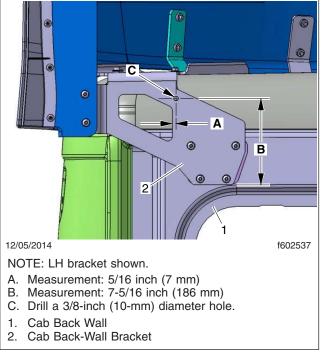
, Drilling Location on Cab Back-Wall Bracket
